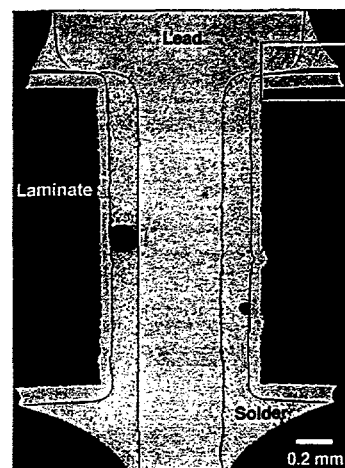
Fillet lifting of a printed circuit board through-hole made with the 91.84Sn-3.33Ag-4.83Bi solder.
